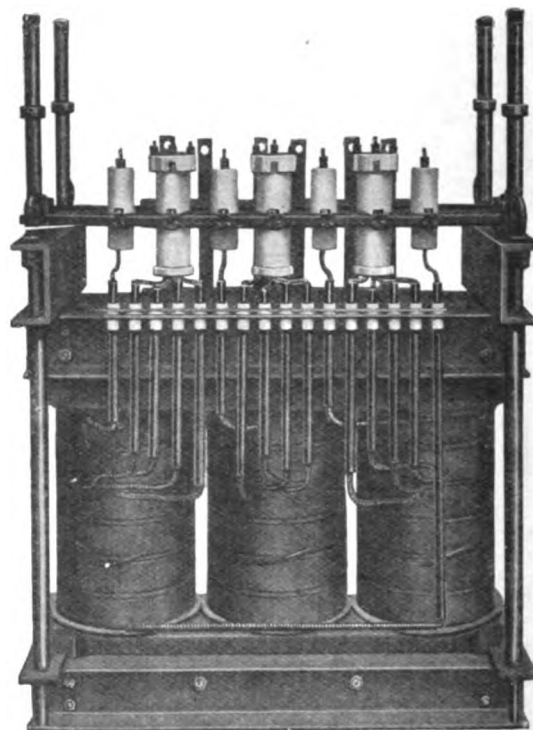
LARGE THREE-PHASE TRANSFORMER REMOVED FROM TANK.
